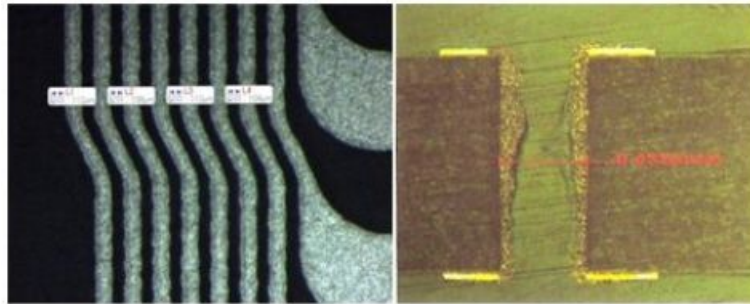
Electronic circuit printing of touchpanel and 0.45mm via-hole with Silver and Copper in PCB made by NDM co., LTD.⁽³⁾
